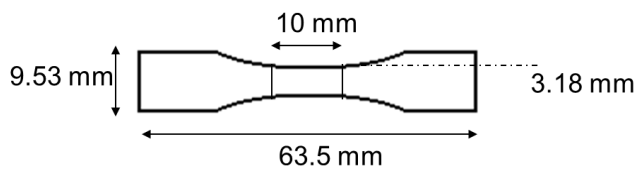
Dimension of the dumbbell-shaped specimen.
